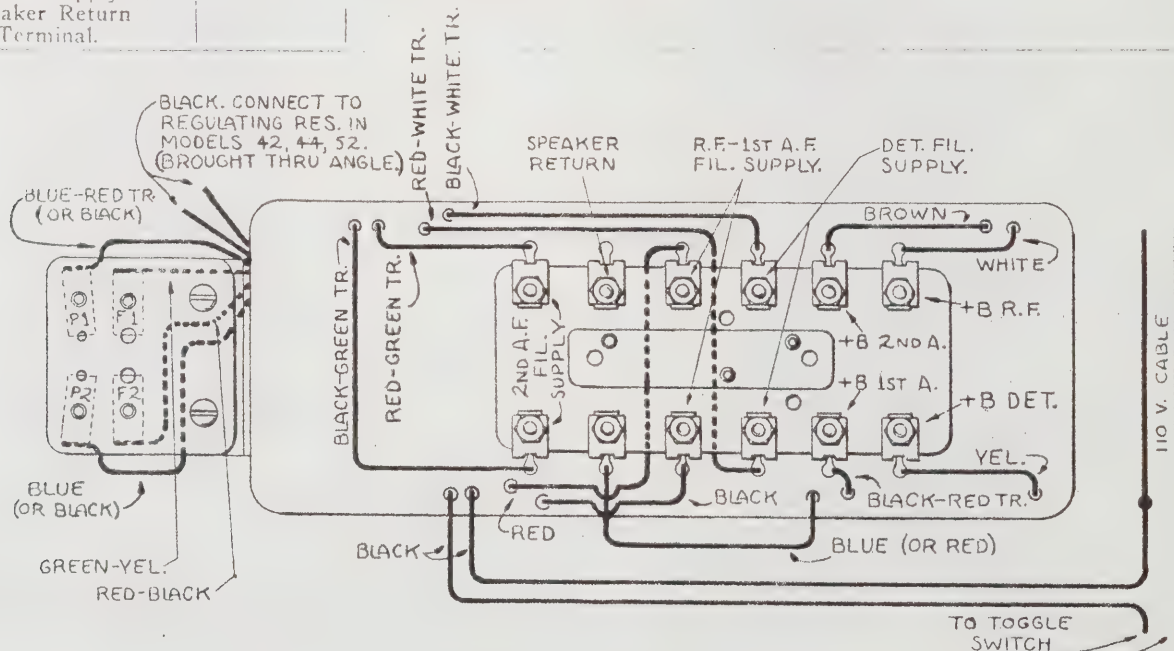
POWER UNIT IN MODELS 40, 42, 44 AND 52, SHOWING CONNECTIONS FROM SEALED CONTAINER TO PANEL ASSEMBLY, RECTIFIER SOCKET AND REGULATING RESISTANCE
